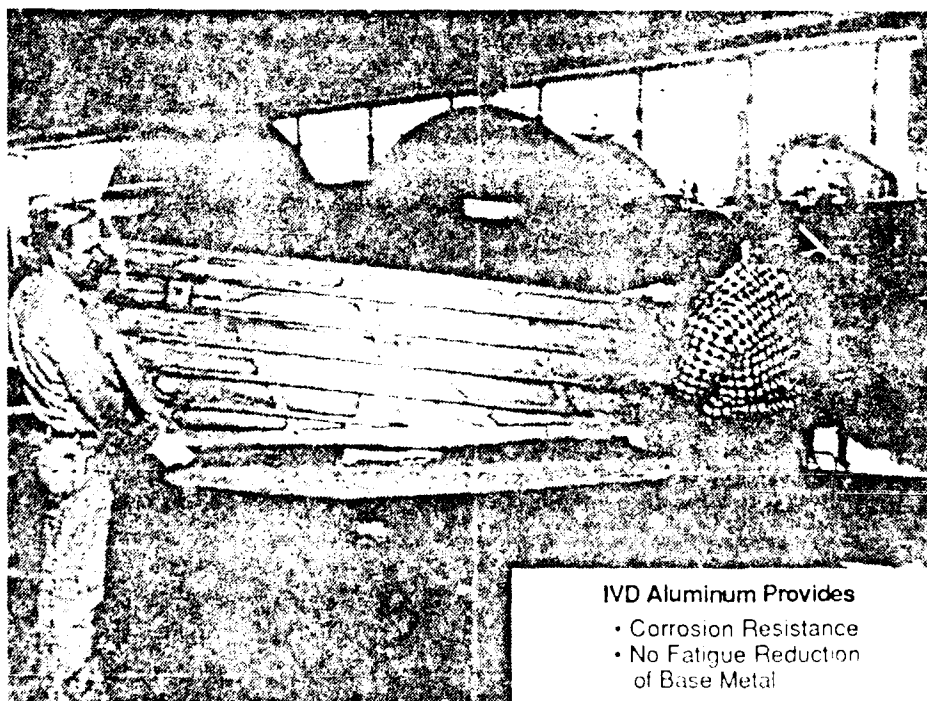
F-15 Aluminum-Coated Fatigue-Critical Aluminum Alloy Wing Skin.
